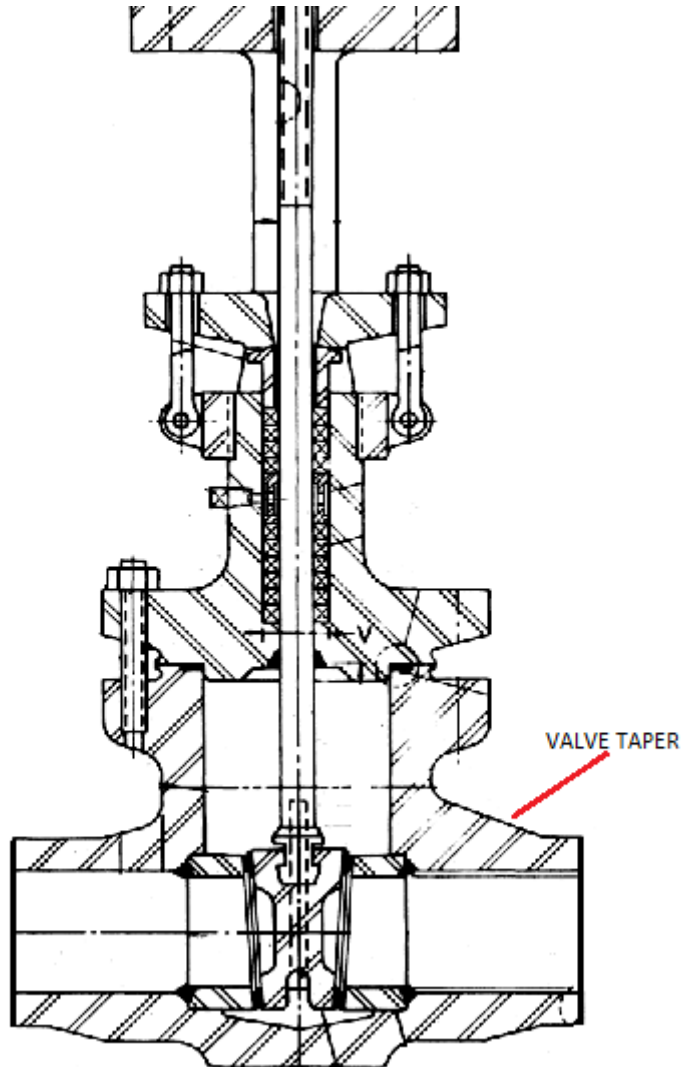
ISI-18.1 Valve taper on RHR-V-112A and B for welds 12RRC(7)A-1 and 12RRC(7)B-1.
